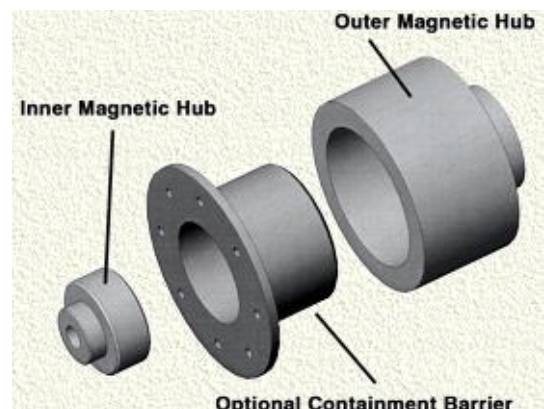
Magnetic co-axial couplings with containment barrier [26]
